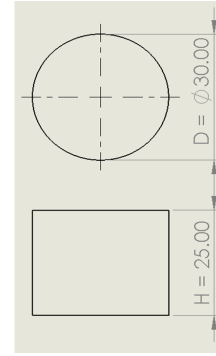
Specimen dimensions used in testing for material properties of TPU under compression load.
